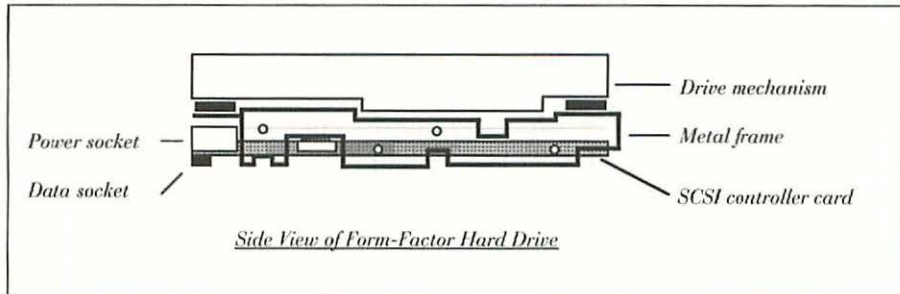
Form-factor SCSI hard drives are made of three separate pieces. The SCSI controller card (1) is joined to the drive mechanism (2) by a metal frame (3).
